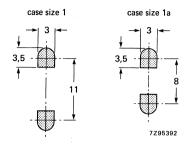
Recommended dimensions of metal connection pads on printed-circuit board or substrate surface.
